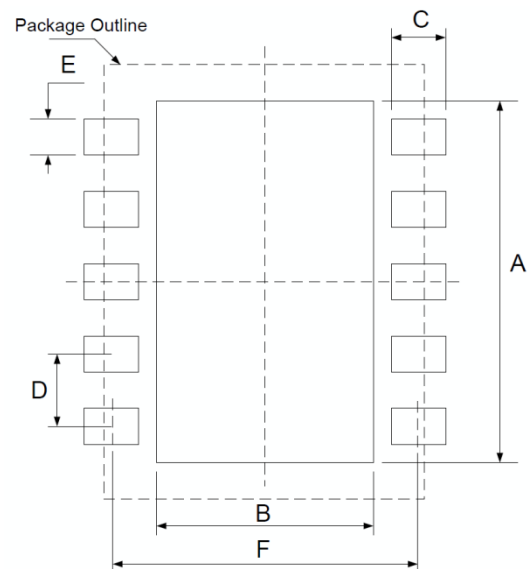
DFN-10 Package dimensions (bottom). Note that the saddle need to be connected to GND on the PCB.
